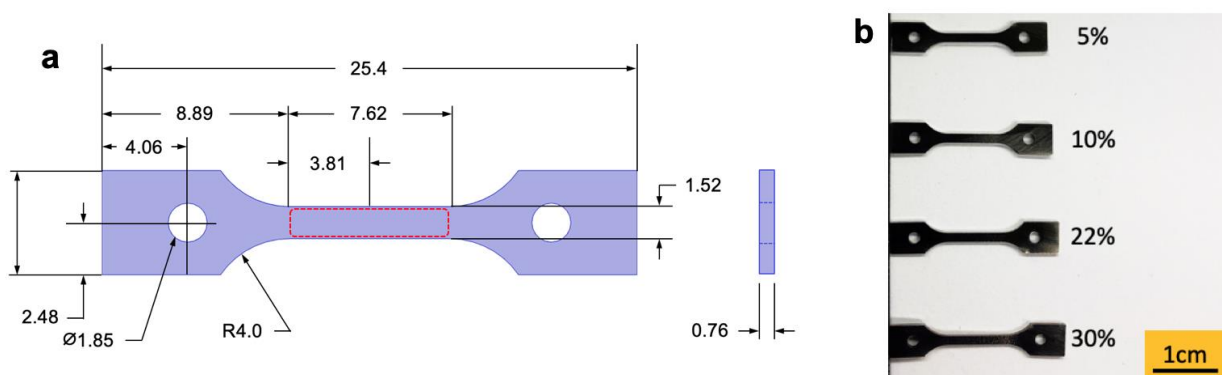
(a) A schematic shows the geometry of the miniature tensile sample used in this work, the dimensions are in mm. (b) The optical photo of the progressively deformed samples.
